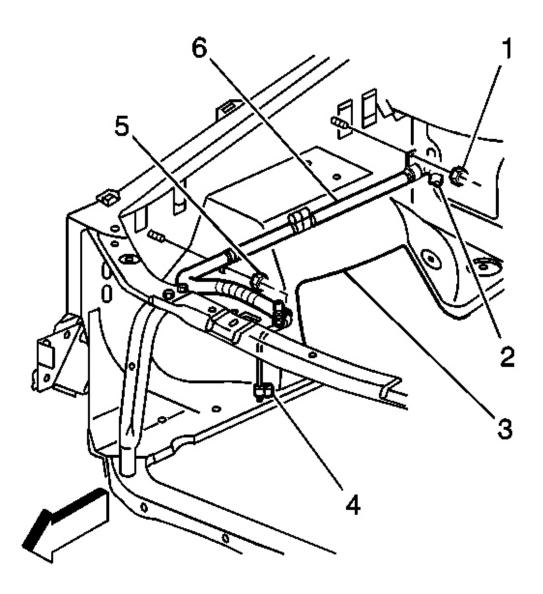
Identifying Evaporator Tube Components Courtesy of GENERAL MOTORS CORP.
